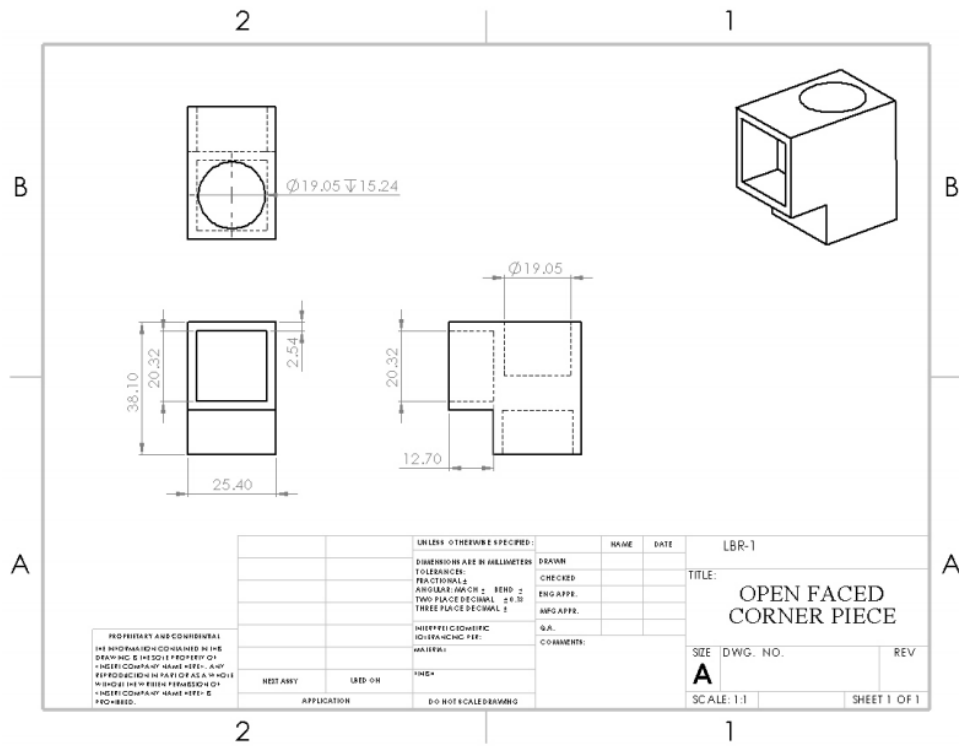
Part drawing of the open-faced corner piece of the cube element.
